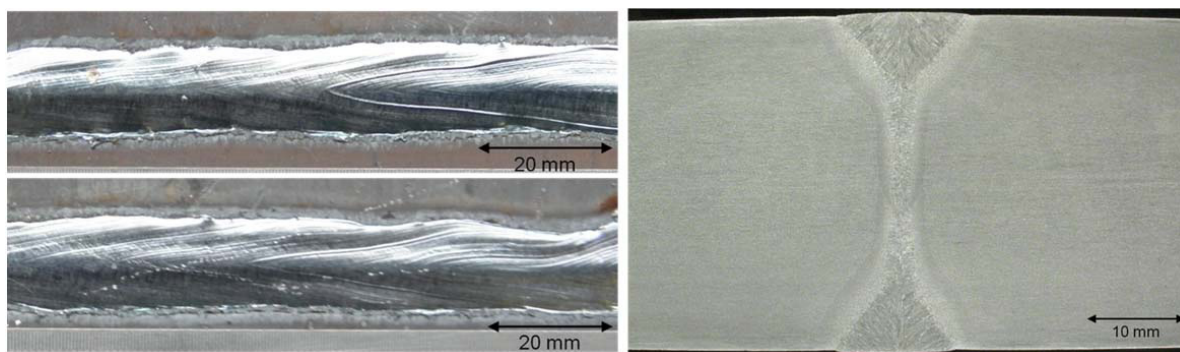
X65, 35 mm, 3 mm negative wire – Weld Seam Appearance (left) – Cross-Section (right).
